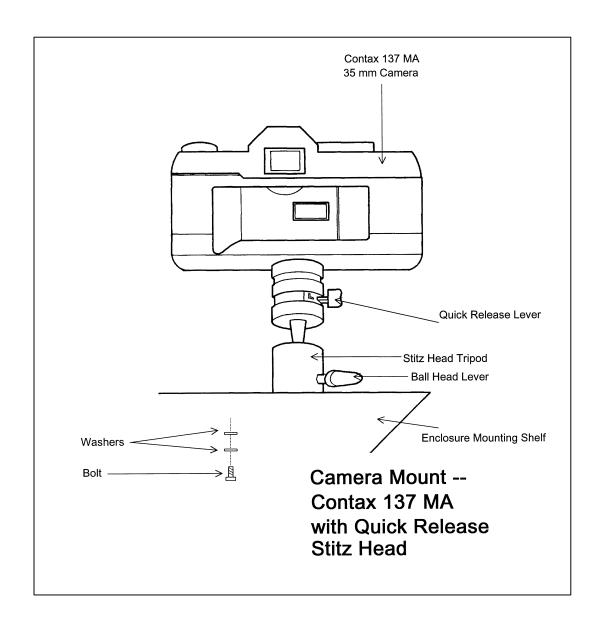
Automatic 35 mm Camera System Tripod Assembly.
